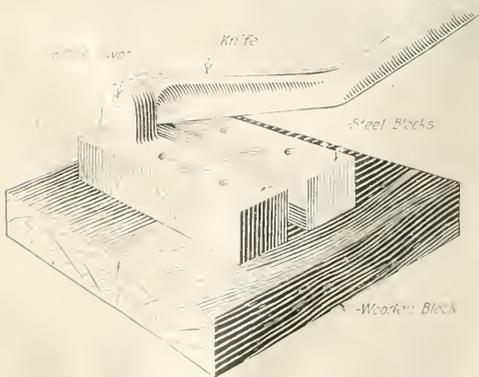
KNIFE FOR CUTTING STRIPS OF BELTING
